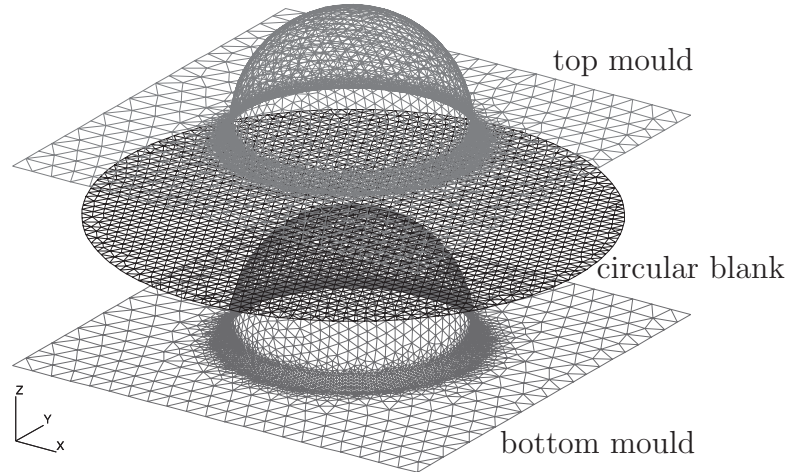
Drape set-up for a hemispherical product; top mould, blank and bottom mould.
